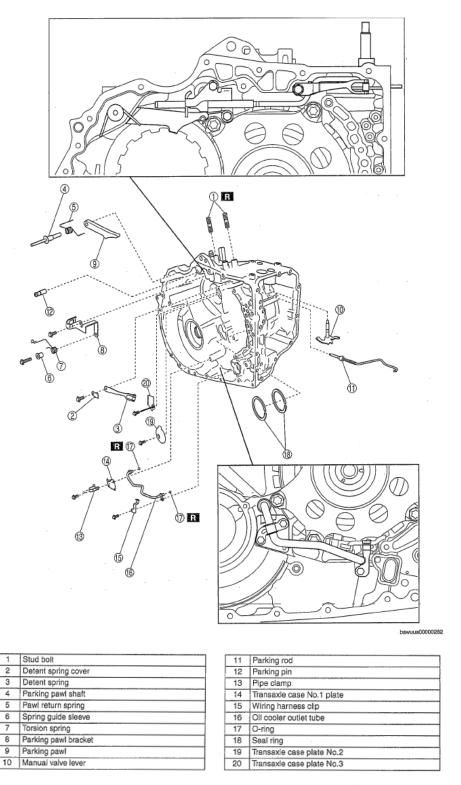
Identifying Automatic Transaxle Disassembly Components (4 Of 4) Courtesy of MAZDA MOTORS CORP.
